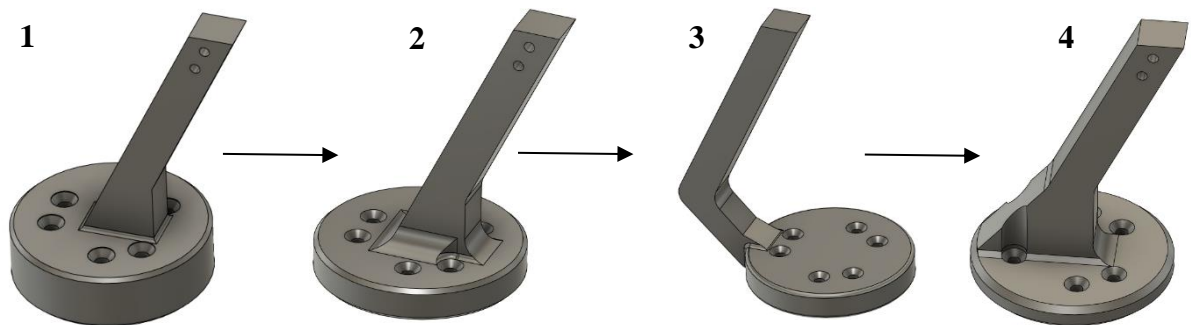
The three prototypes of the top part that makes the connection between the new hand module and the force/torque sensor (1-3) and the final version of this part (4).
